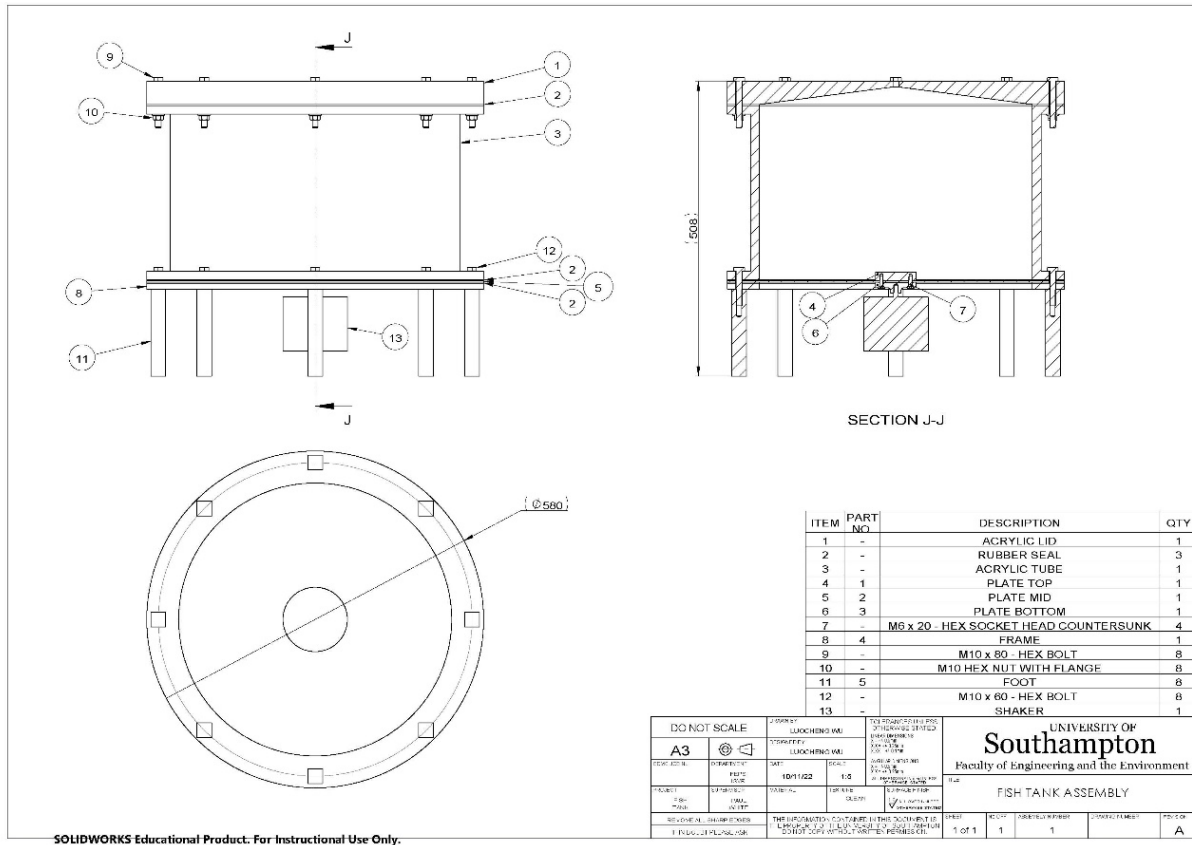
The 2-D engineering drawing of the new test tank assembly.
